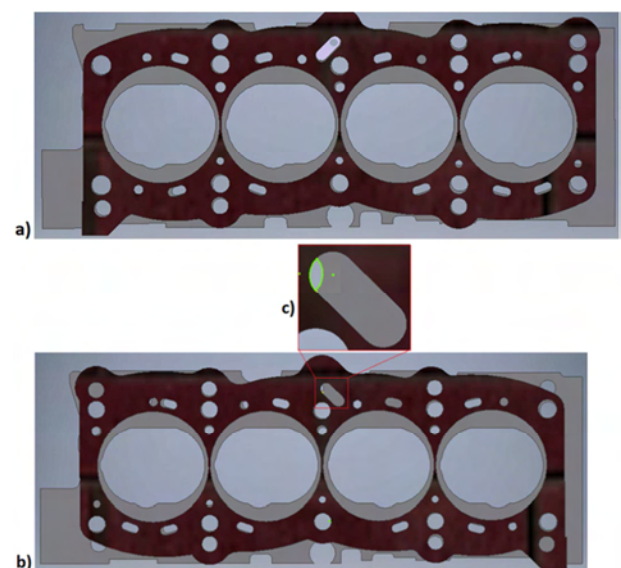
An arrangement of the gasket relative to the head, a) correct, b) incorrect, c) enlarging the view of the pocket before entering the oil main line for camshaft bearings
